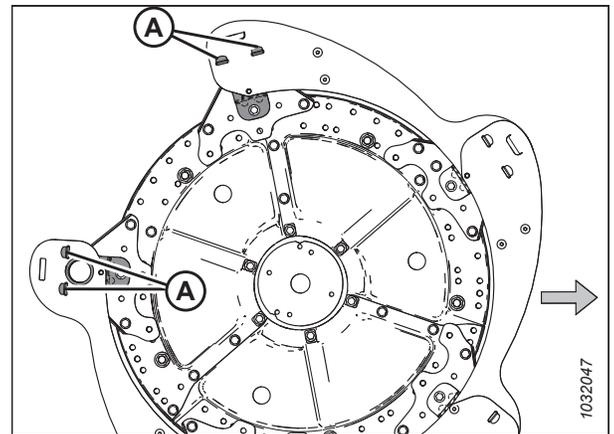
Reel Endshield Removed – Inboard Cam End
